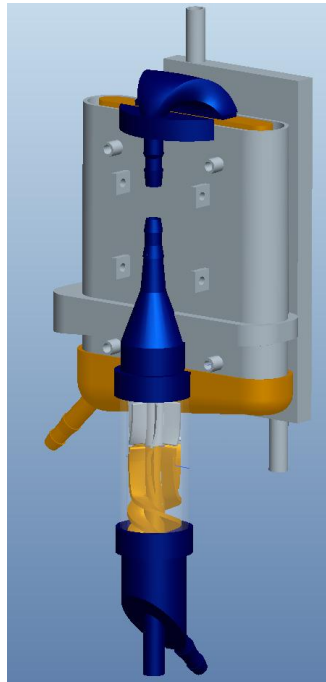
ProEngineer assembly model of the pre-integration components suggesting a possible configuration for integration.
